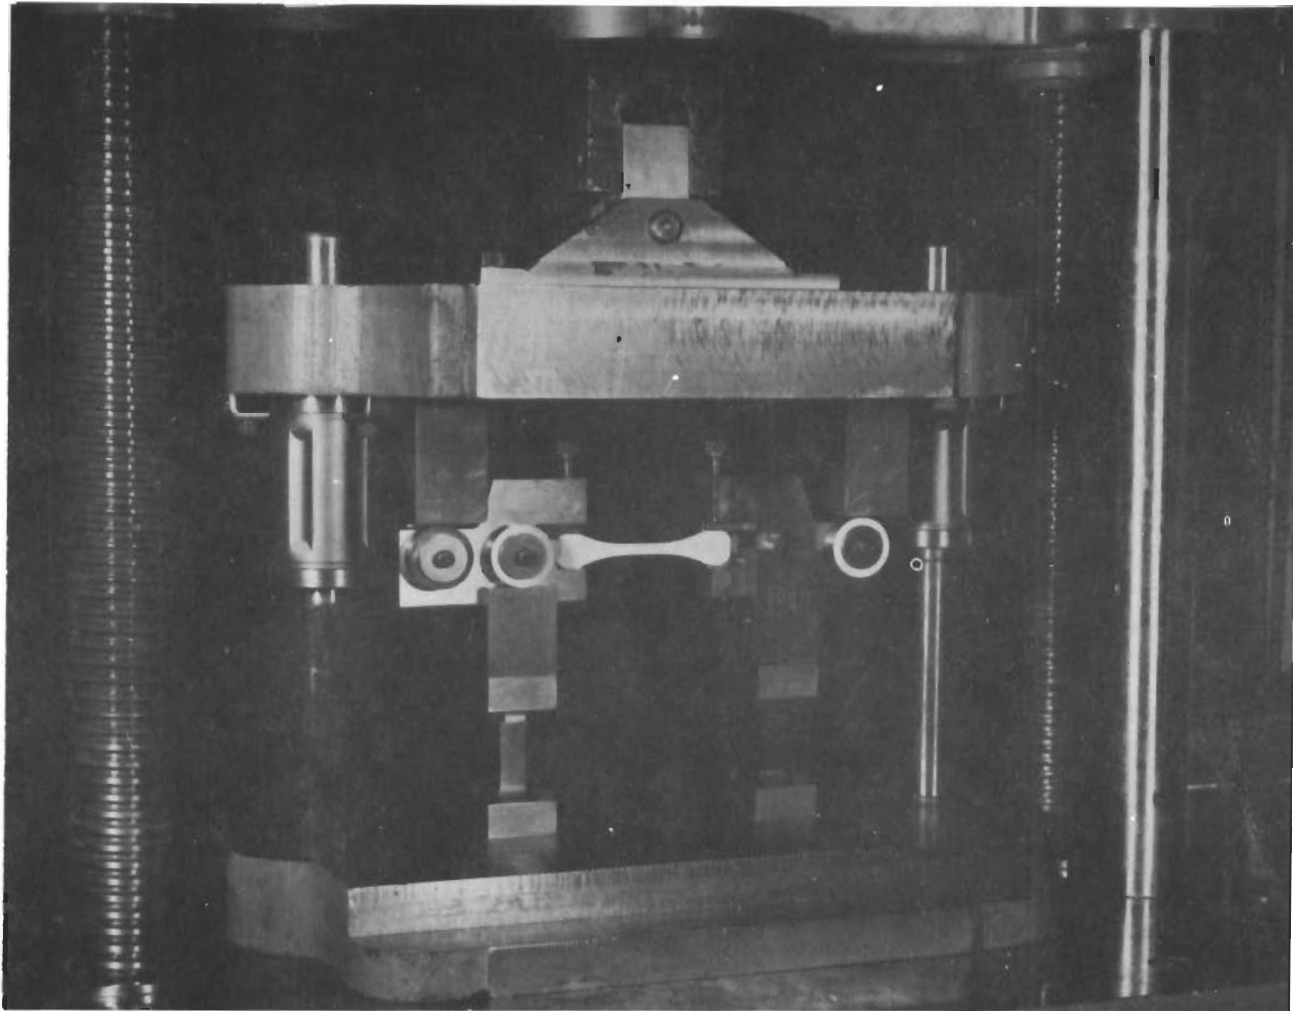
CLOSE-UP VIEW OF SPECIMEN BEND FIXTURE
